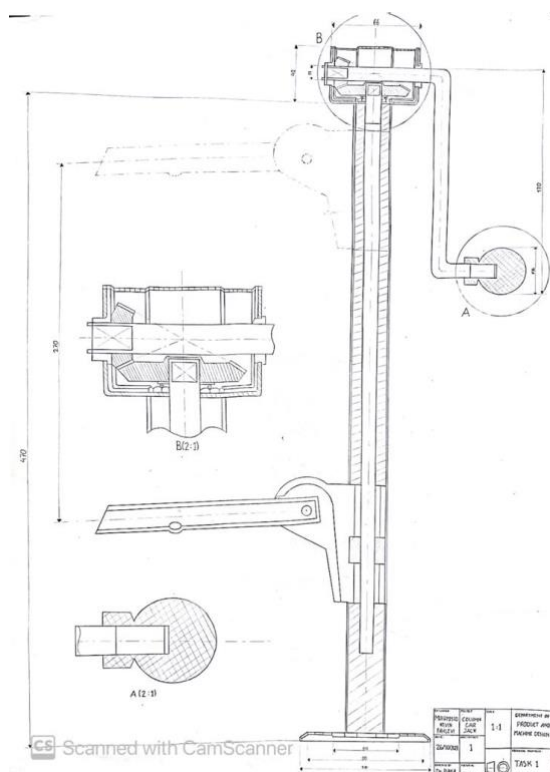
The assembly view of the construction drawing of the Column Car Jack
